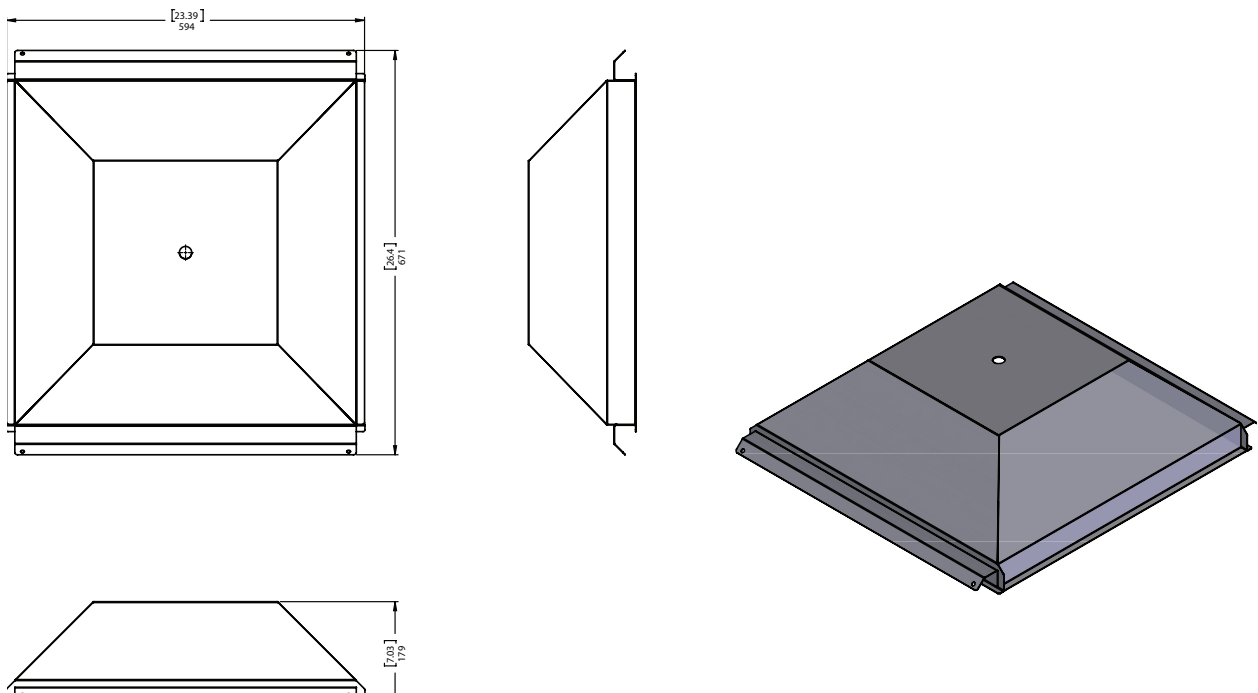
Recessed-mount Rigging Kit (RCT-24) Top and Side Views
